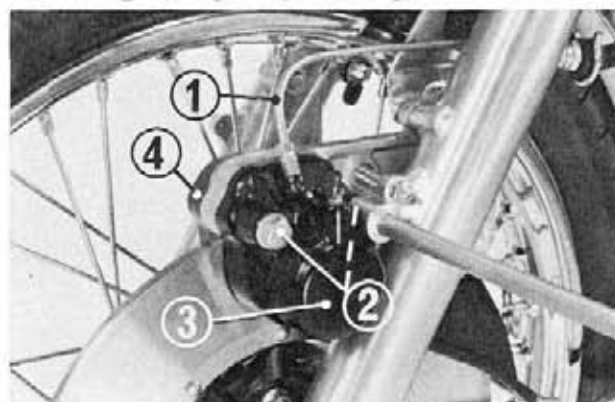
① Oil pipe ② Caliper setting ③ Caliper A
